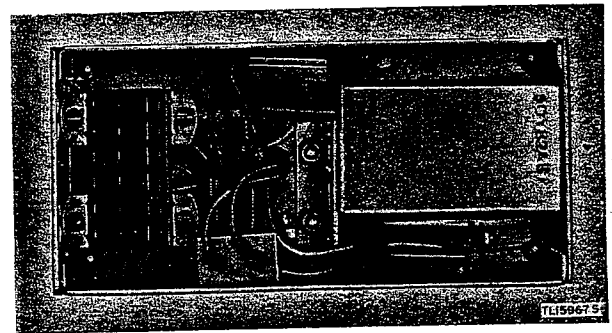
Dynamotor DM-34-(*), or Dynamotor DM-36-(*), bottom view.
